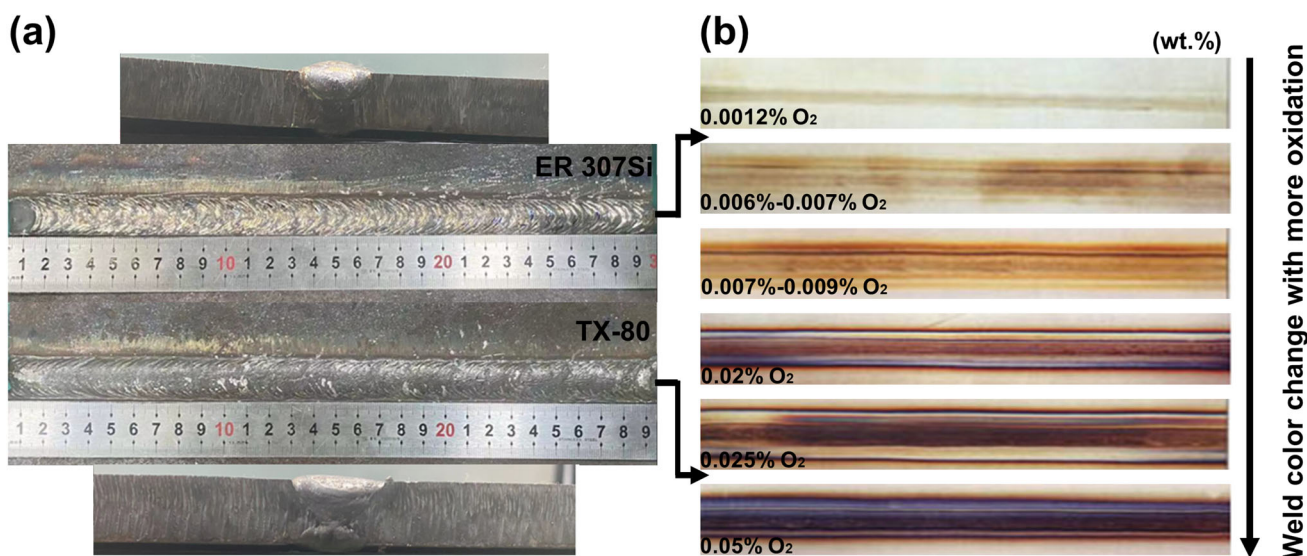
Weld appearance. a Overview of welds; b weld color with different oxidation levels
